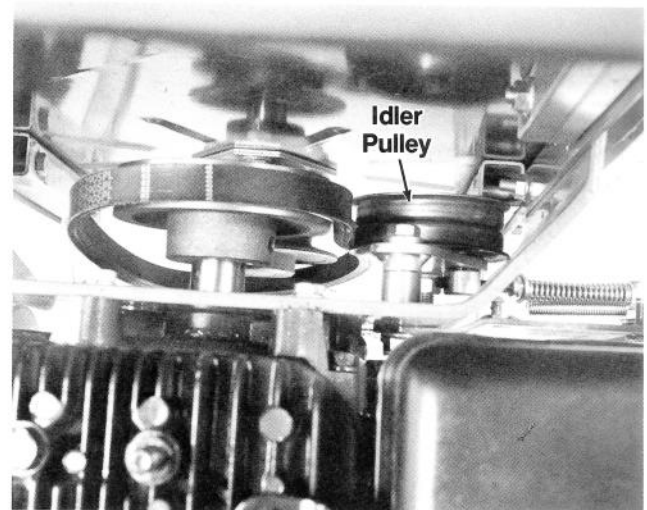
Remove the belt cover held in place by two bolts and locknuts. The lower pulley and drive belt are behind it.
